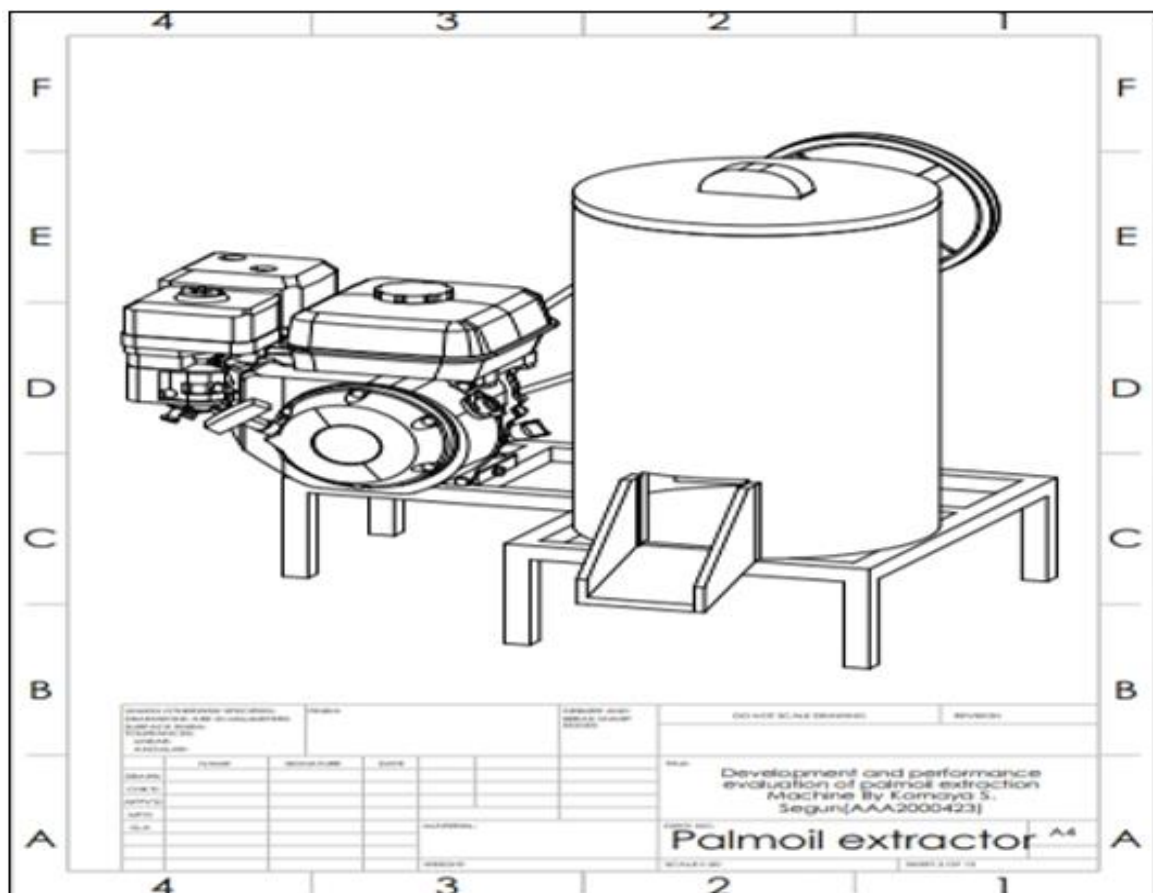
The Isometric View of the Palm Oil Extraction Machine
